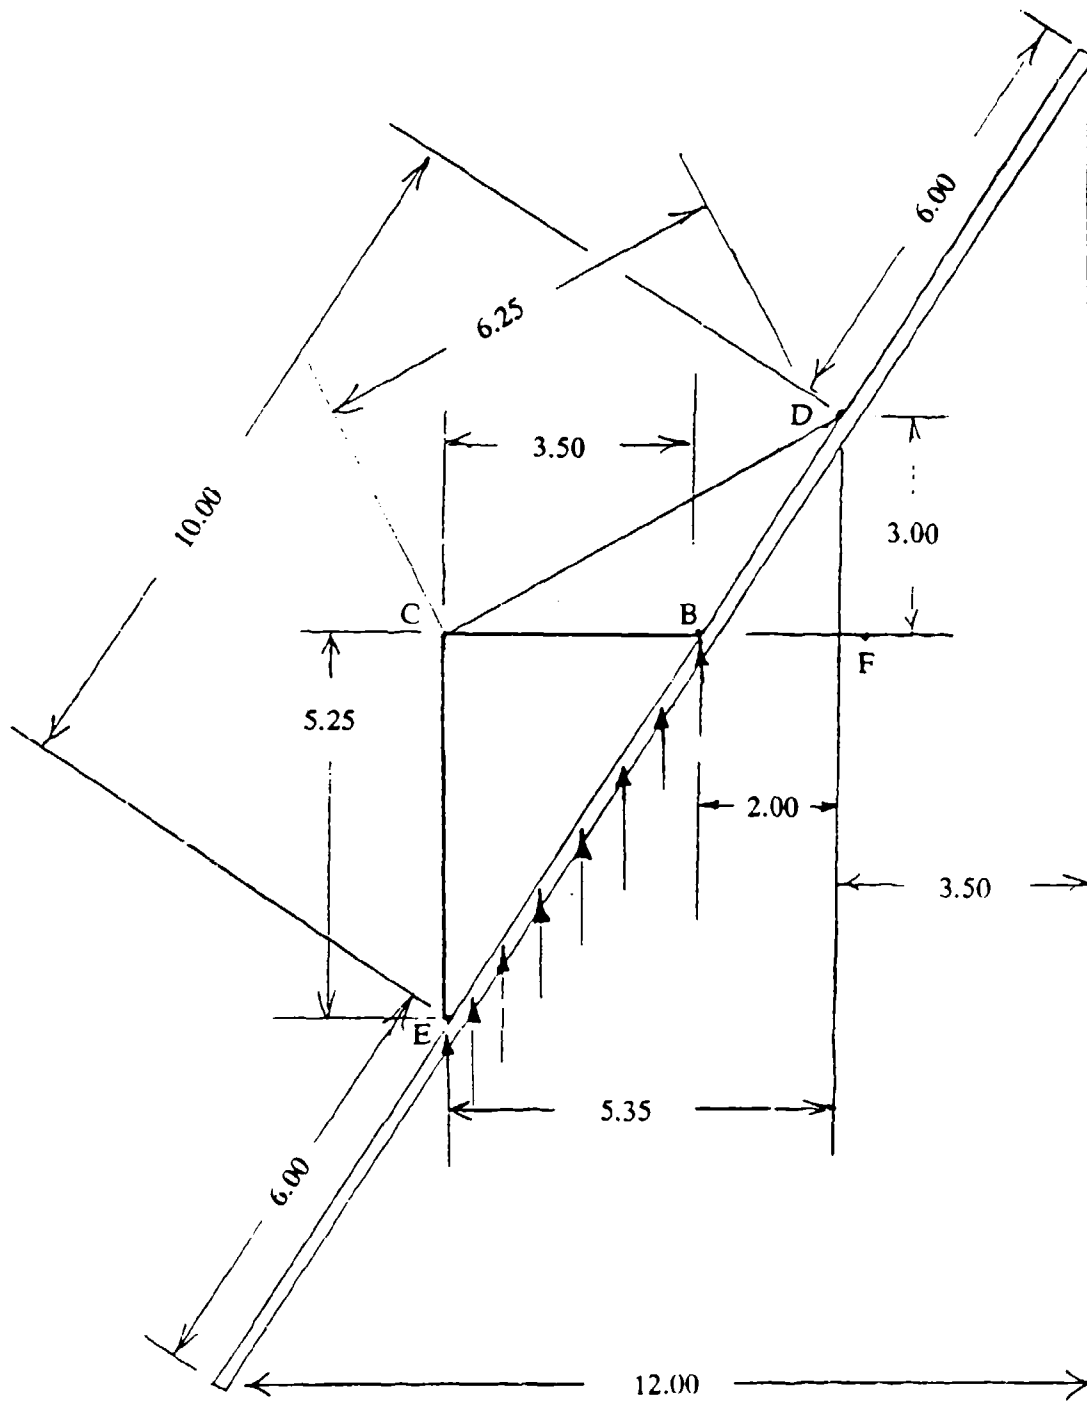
Side view from the front showing the dimensions of the two components of the strut cap assembly on the LAV.
